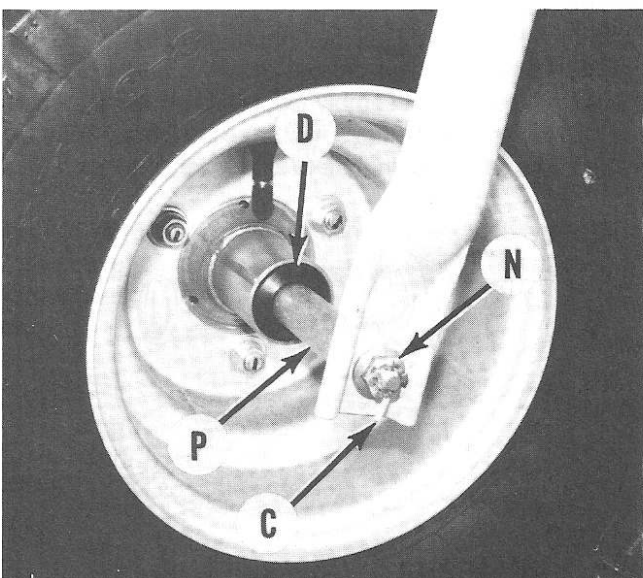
View of front wheel used on all models except YT175J and YT175K.
